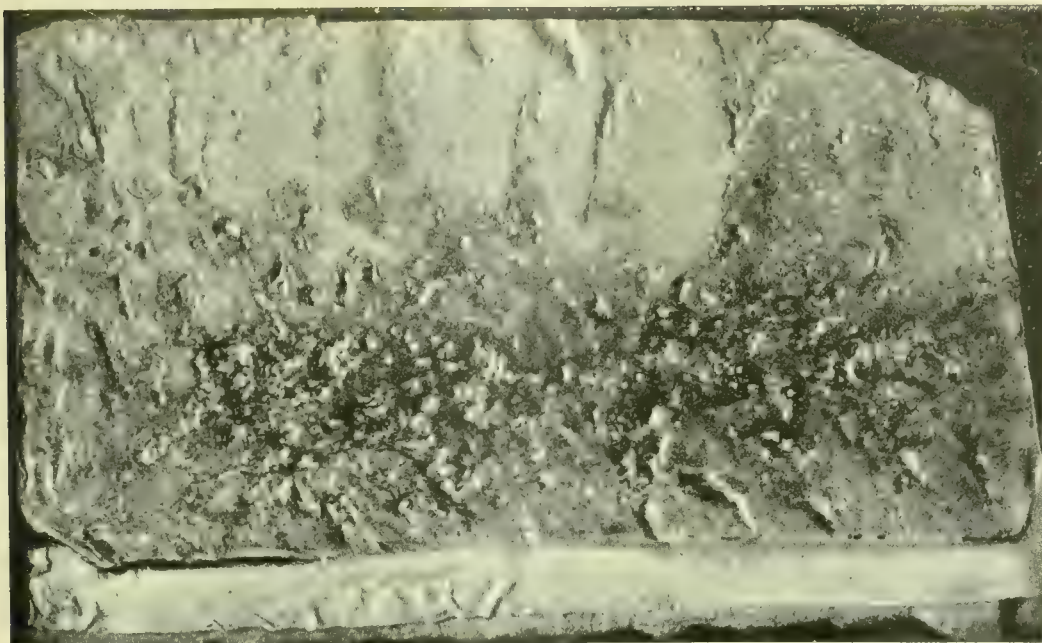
PRINT FROM PART OF FRACTURE OF A STEEL TYRE.
